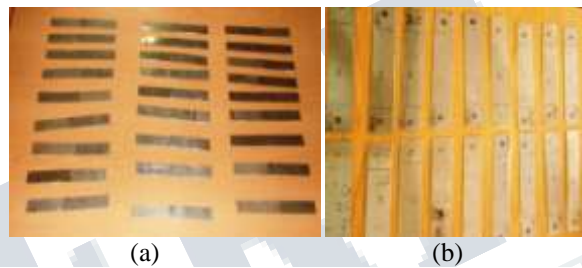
(a) Welded specimen (b) Broken specimen
